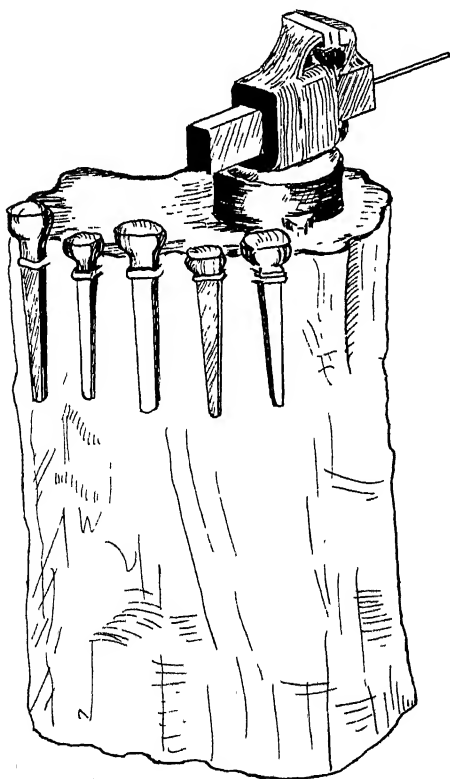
Vise and Stakes Mounted on Hard-wood Block
